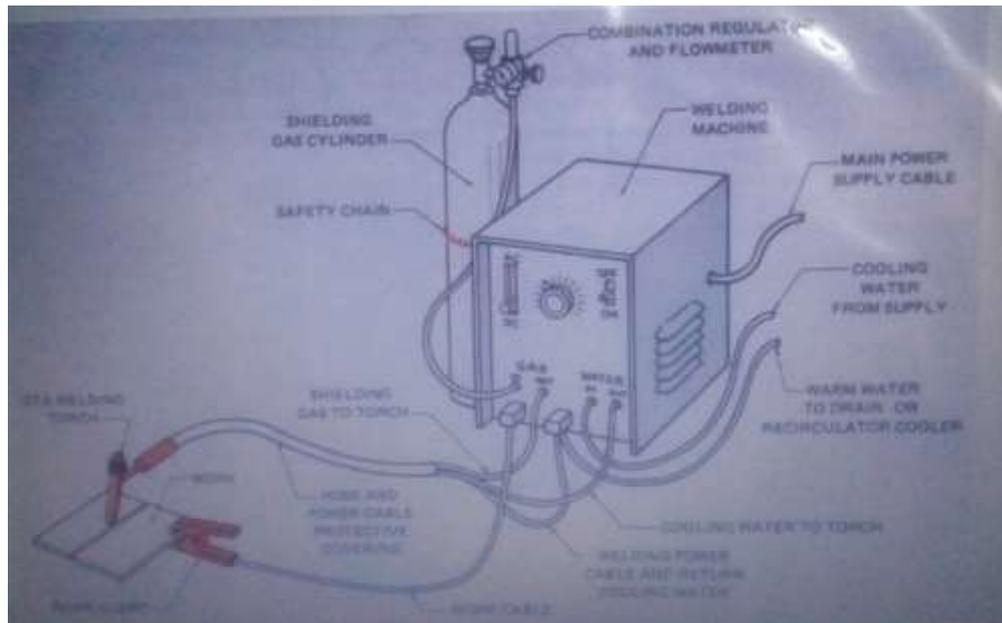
Gas tungsten arc welding (GTAW)
